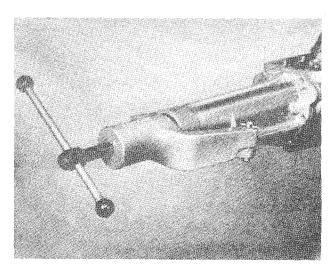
Showing the removal of Gearbox Extension with Churchill Tool No. 20S. 63.
